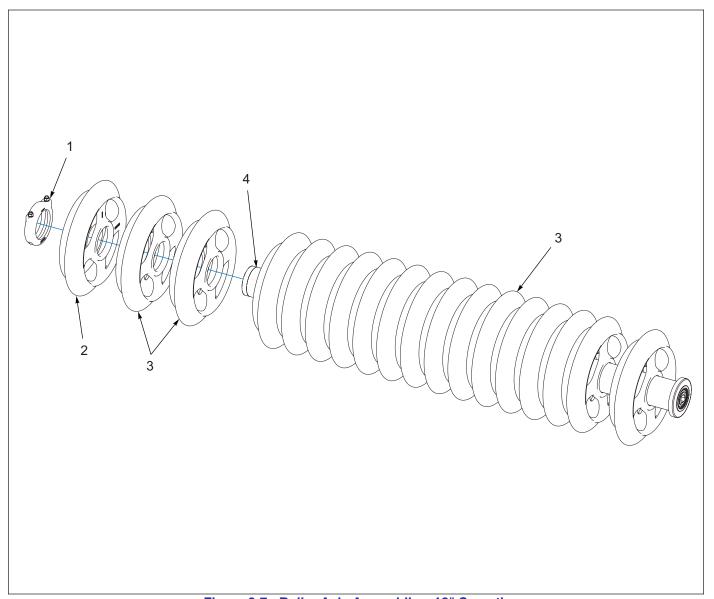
Roller Axle Assemblies, 18" Smooth
